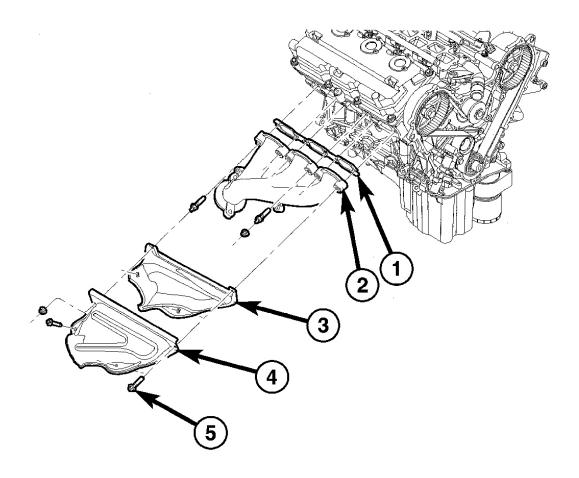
Right Exhaust Manifold Courtesy of CHRYSLER LLC
